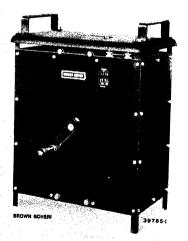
Inductive welding-current regulator Type TZ II allowing smooth regulation of welding current, for a plant with multiwelding sites.
